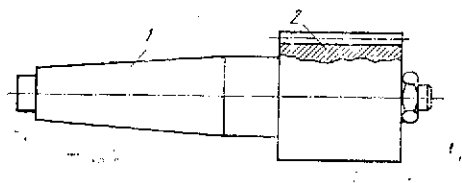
Electrode tool for manufacturing a gear with an inside tooth.
